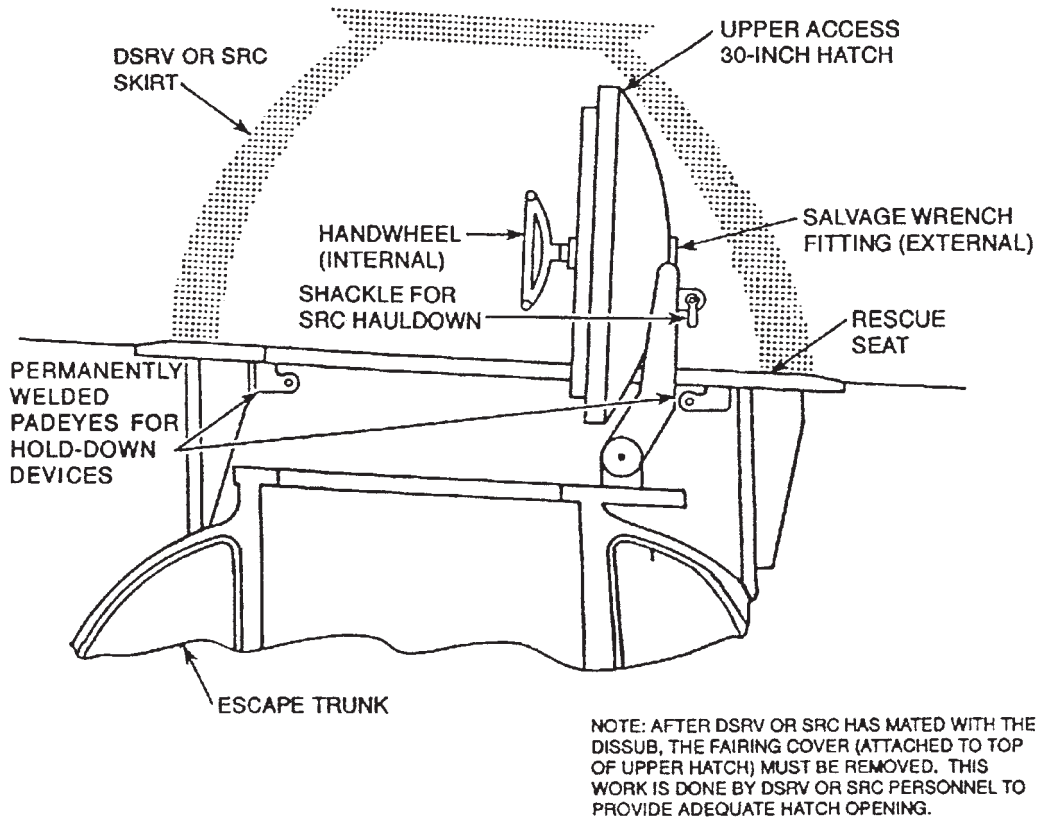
Features of Typical Rescue/Escape Trunk with 30-Inch Upper Access Hatch
